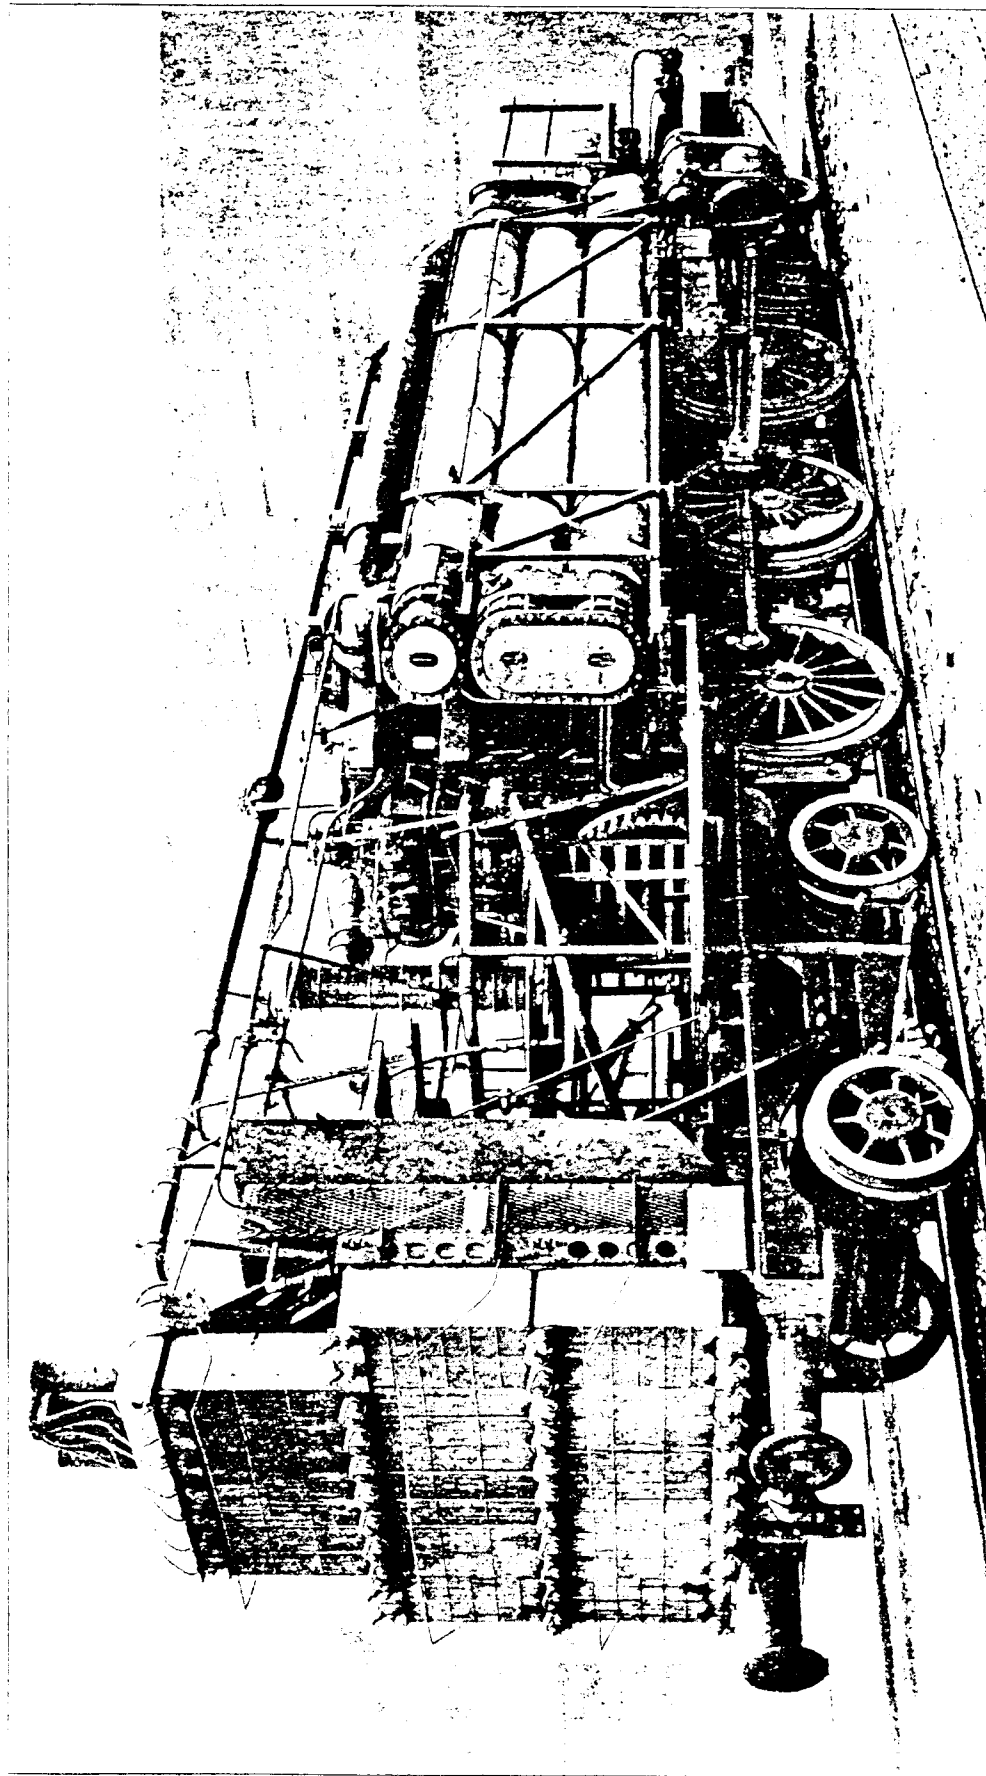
VIEW SHOWING THE AIR-COMPRESSOR AND ACCESSORIES
